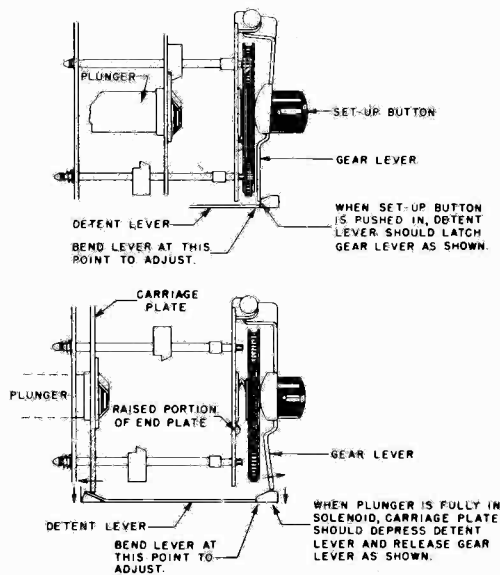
GEAR LEVER LATCH ADJUSTMENT
